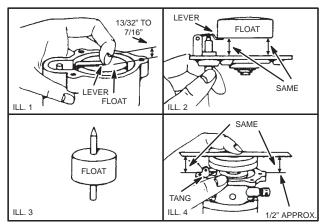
CHECKING FLOAT POSITION (EARLY)
